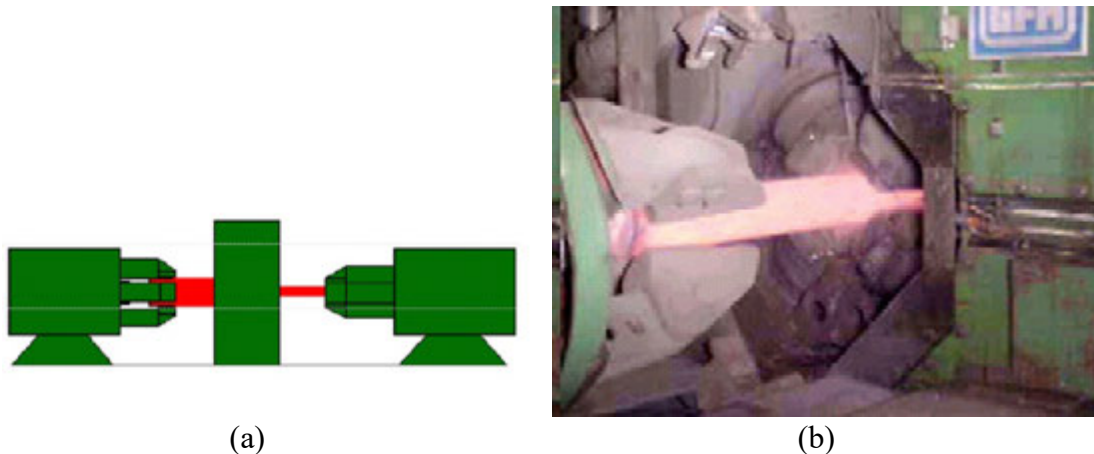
Rotary forge schematic (a) and (b) view of manipulator feeding billet into the reciprocating dies.
